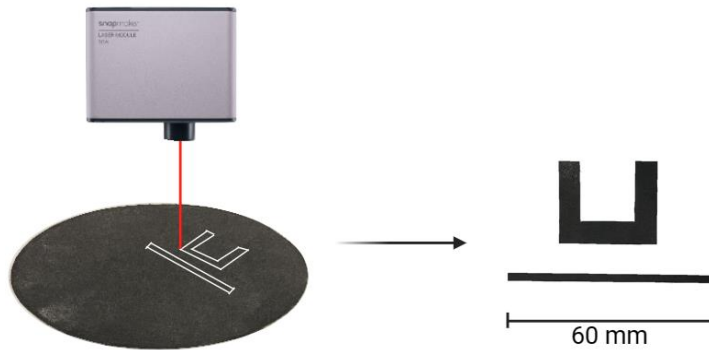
Demonstration of the sensor designs laser cut from a larger sheet of paper. The top sensor is the U-shape, and the bottom is the strip sensor.
